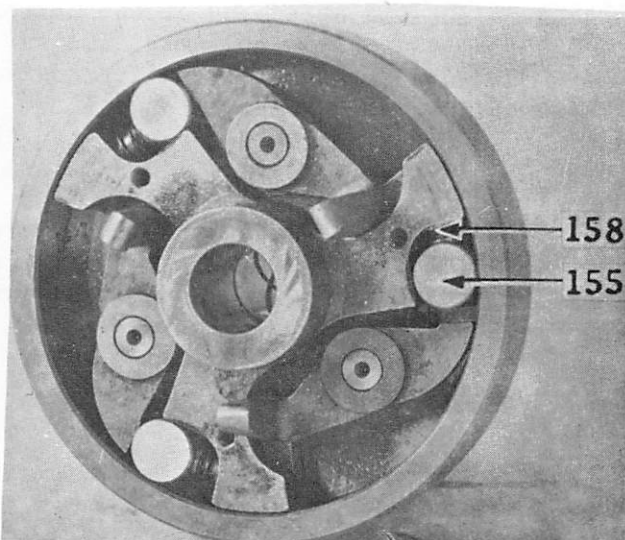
Rapid Feed Clutch Disc Showing Clutch Rollers, Springs, Levers and Carrier Assembled
